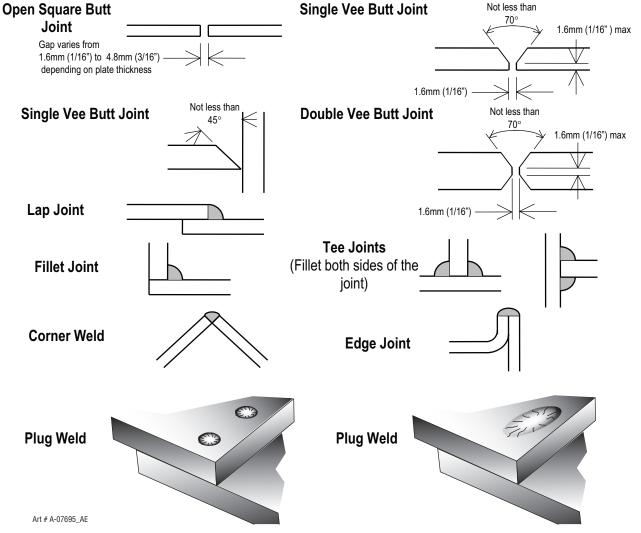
Typical Joint Designs for Arc Welding
